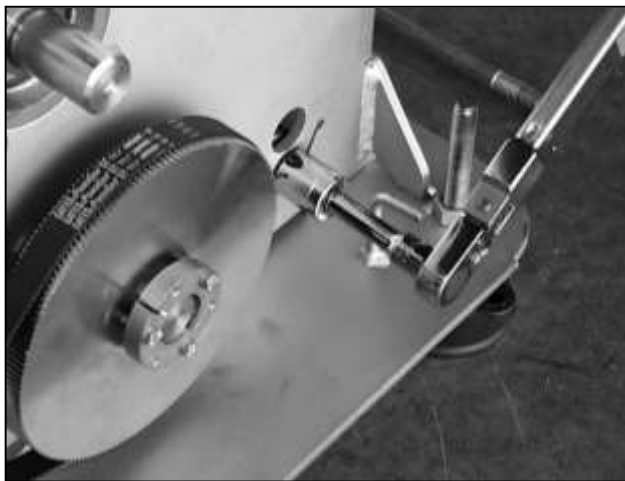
Tightening the Drive Arm Pivot Bolt
